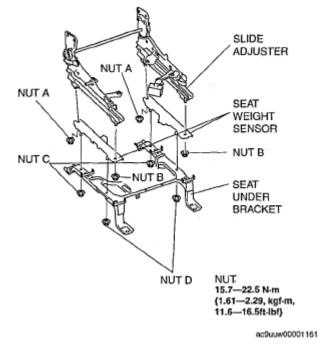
Identifying Seat Under Bracket, Seat Weight Sensor & Torque Specifications Courtesy of MAZDA MOTORS CORP.
